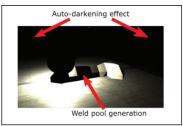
The weld pool generation and darkening effect of GMAW welding.
